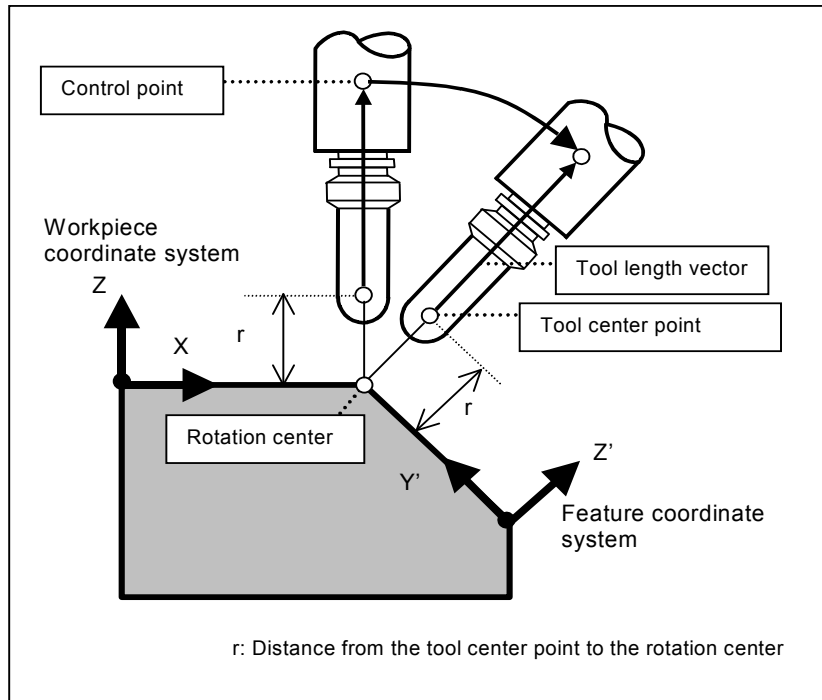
(e) Operation of rotation center compensation with tool center point retention type tool axis direction control (tool rotation type)
